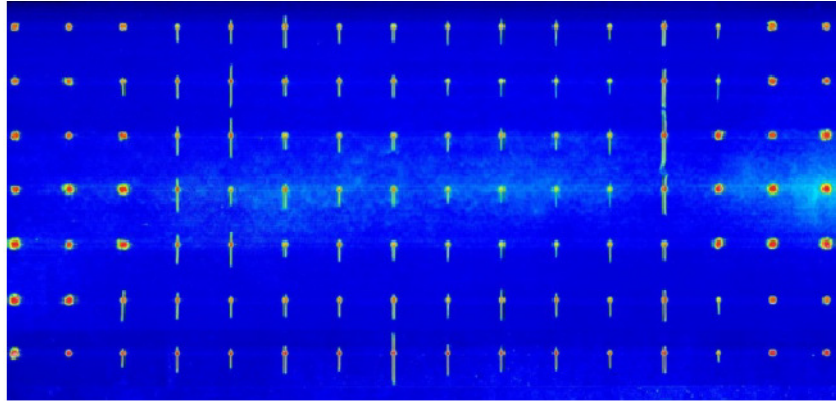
Fatigue tested panels scanned by EC showing a typical C-Scan of a 7075-T6 aluminium panel outlining the holes and fatigue cracks of varying sizes.
